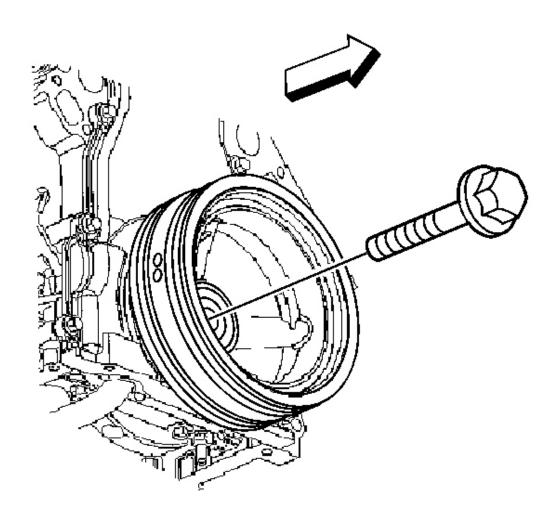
Crankshaft Balancer And Retaining Bolt Courtesy of GENERAL MOTORS CORP.
